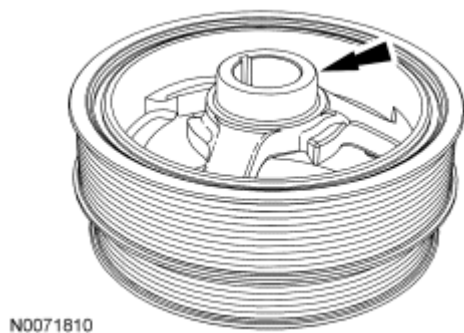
Lubricating Crankshaft Pulley Sealing Surface With Clean Engine Oil Prior To Installation
